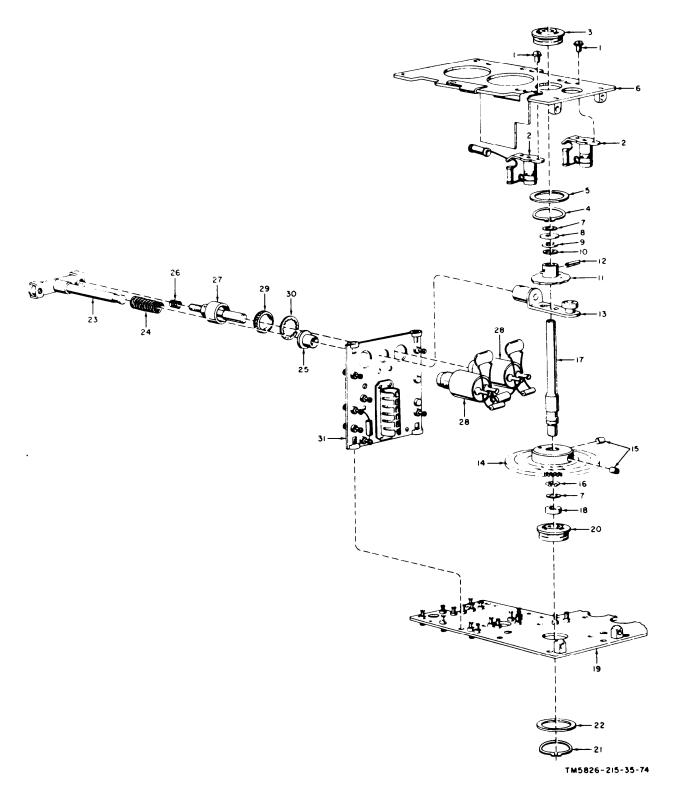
Disassembly of fractional megacycle tuning mechanism.
